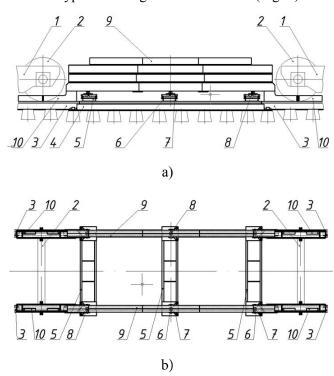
New version of VNKU-60: side view (a); top view (b), where: 1 = railroad cars; 2 = wheelsets of cars; 3 = railroad rails; 4 = load carrier; 5 = weight-transmitting devices; 6 = weight-measuring devices; 7 = strain-gage sensors; 8 = loading devices (hydraulic jacks); 9 = load-receiving devices; 10 = clamps for wheels
